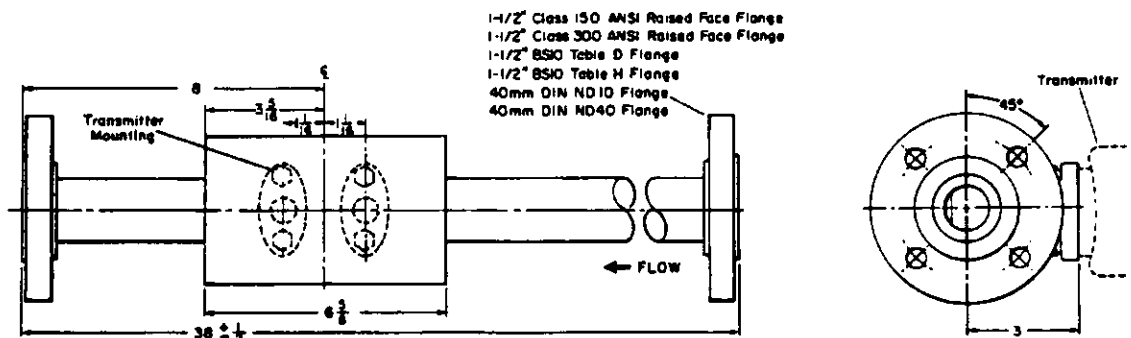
Mounting Dimensions for 1335L and 1336L Integral Elements
